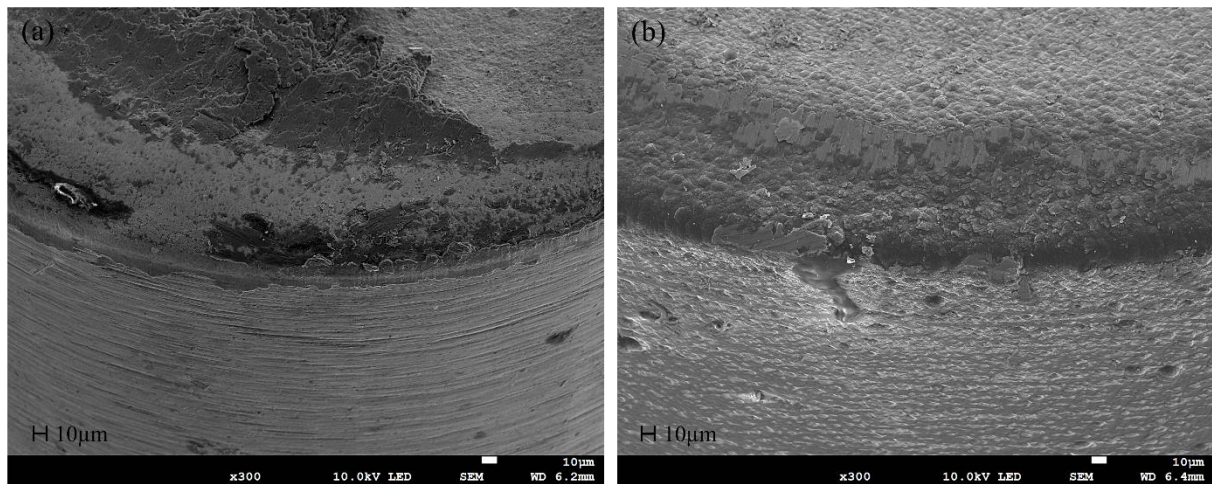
Enhanced SEM images of material transfer characteristics at the cutting edges of (a) WC-Co cemented carbide and (b) CVD coated cutting tools. Both images taken from test performed under 5 s continuous workpiece interaction at a cutting speed of 1200 m/min.
